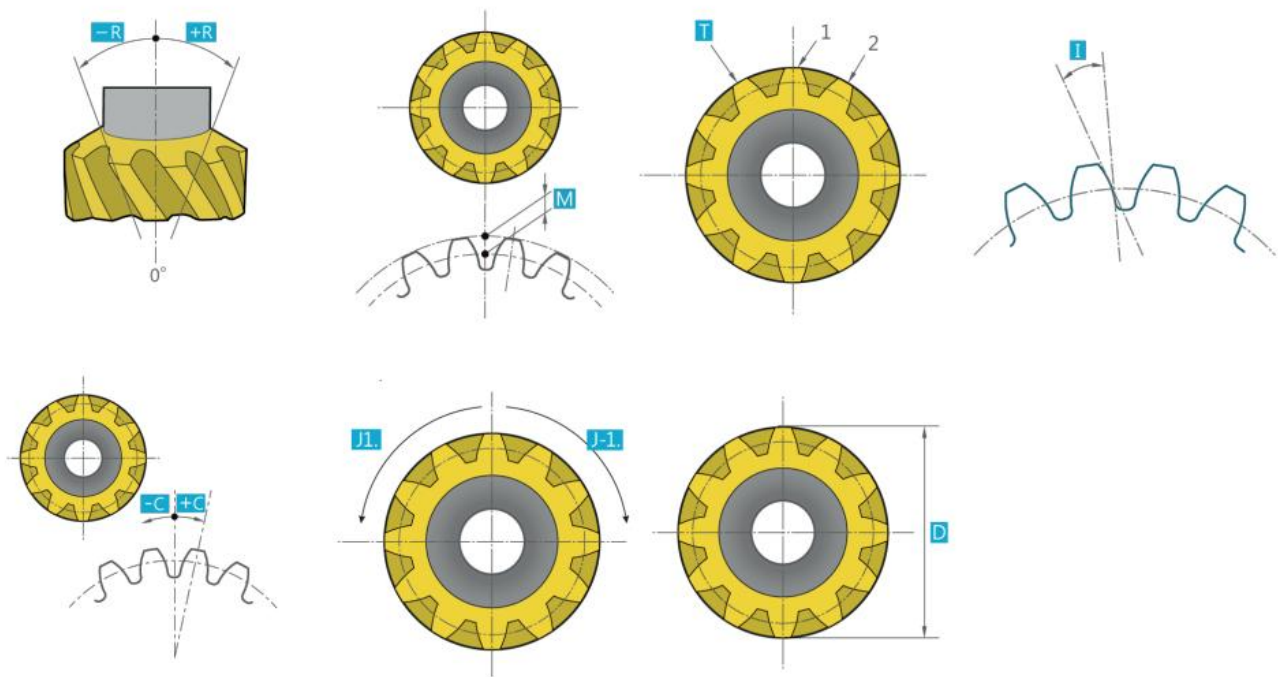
Cycle definition of a tool for bevel machining gear [20]
